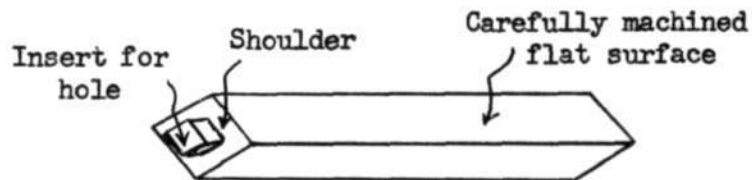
Tool used for aligning and polishing outer edges of picture frame.
